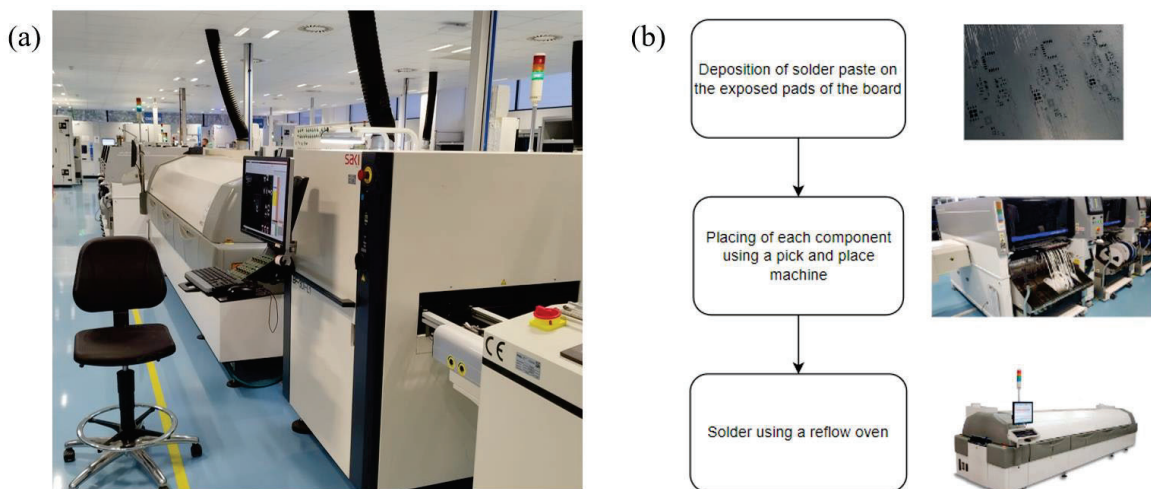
Assembly of the ONAVITAL PCB. (a) Image of the SMT line and (b) schema of the soldering process.
